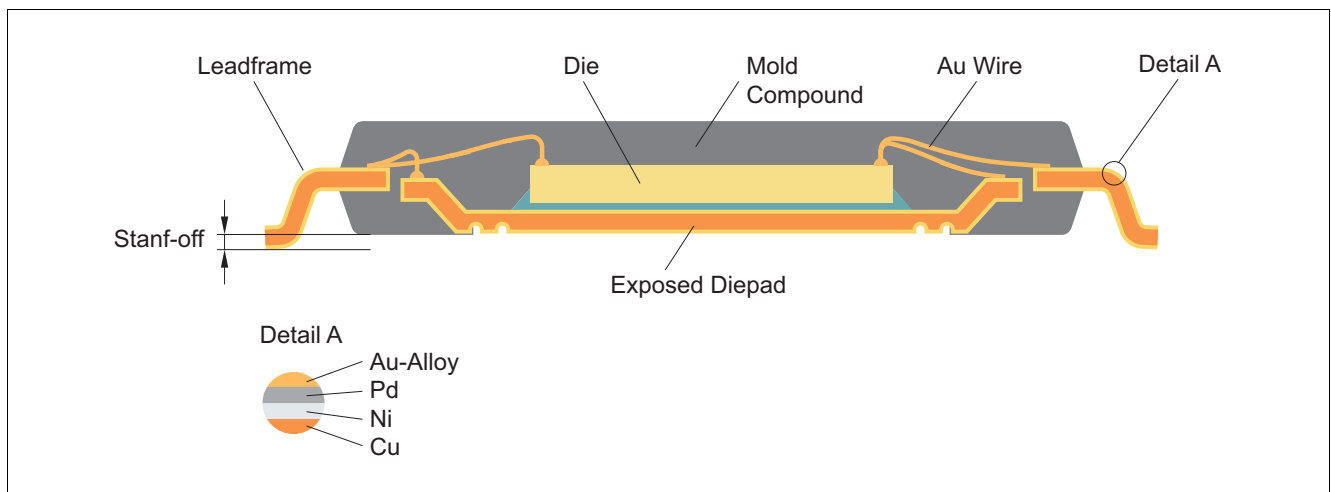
PG-LQFP with exposed die pad and overall NiPd(Au-Ag-alloy)-plating
